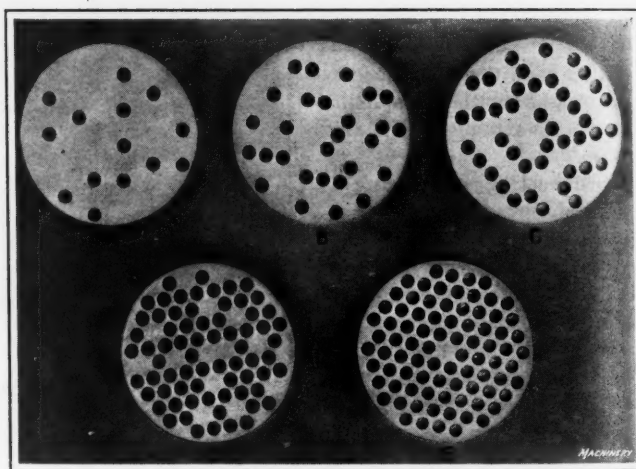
Condition of Work done on Machine shown in Fig. 46 after First, Second, Third, Fifth, and Sixth Drilling Operations have been performed
